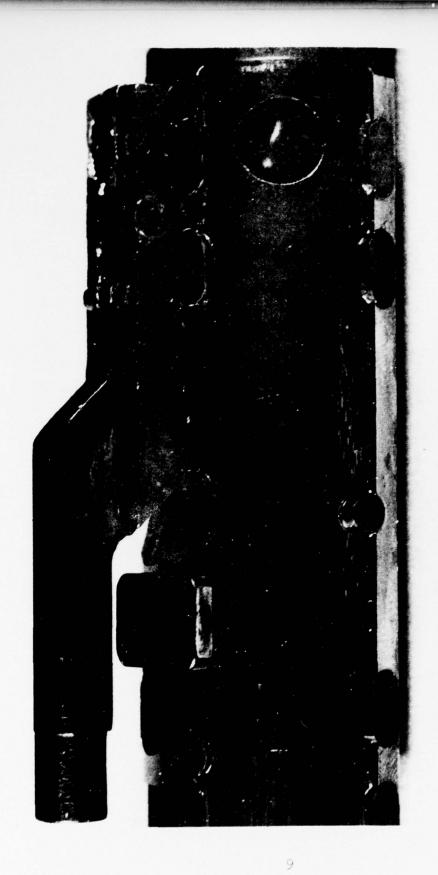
Left Side View of Bolt Carrier With Inserts Ready for Test.
